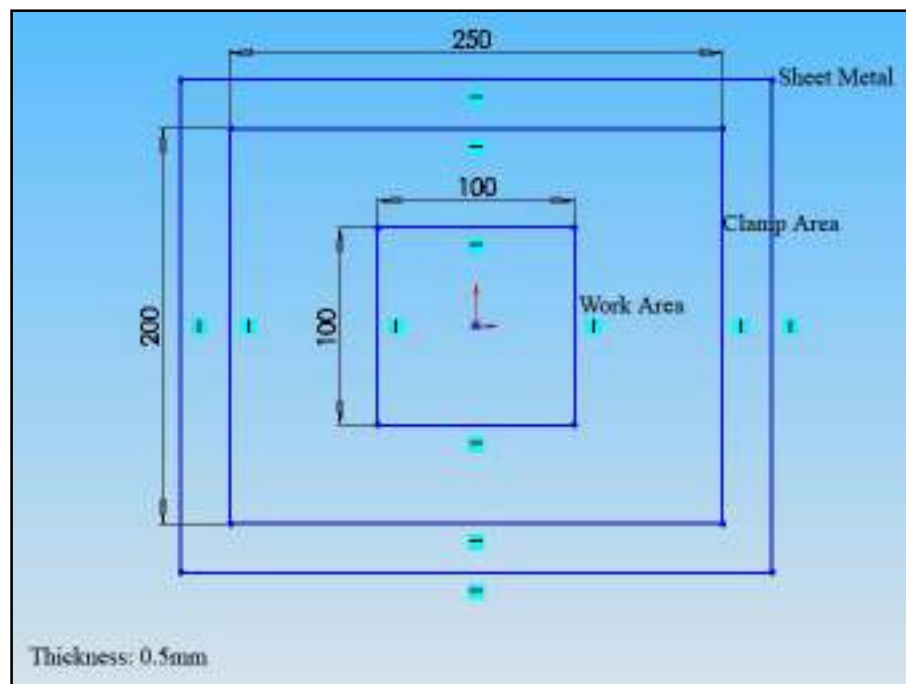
Design Of Sheet Metals For Incremental Forming Test
